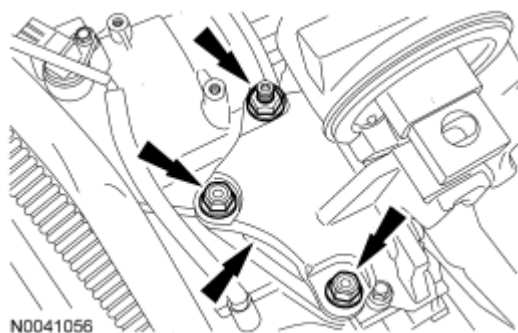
Locating Transaxle Insulator Bracket And Nuts
